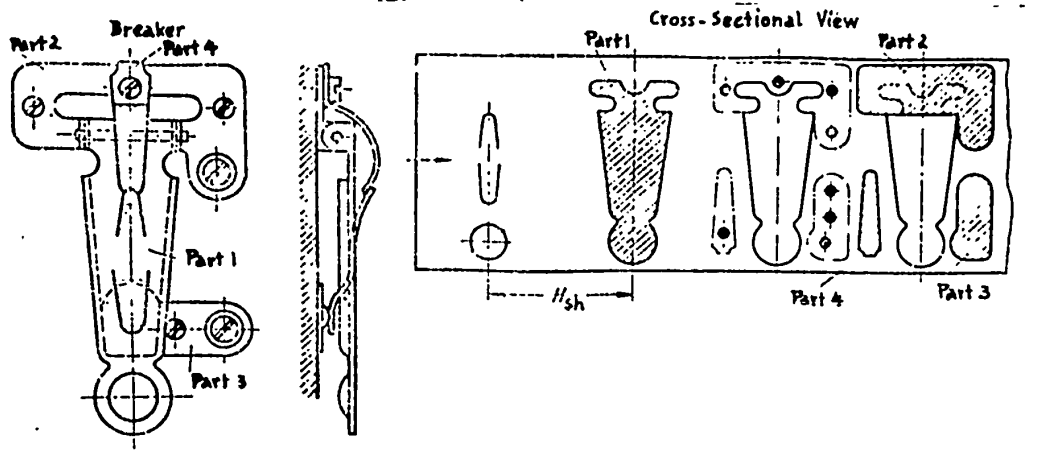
The Configuration of the Parts Composing the Interrupter is Closely Related to the Way the Parts are Cut up; Parts 2, 3, and 4 Look as though They are Obtained from the Excess Material (Waste) of Part 1. (The interrupter sectional view is drawn to a larger scale than the sectional view of the cut-up)
